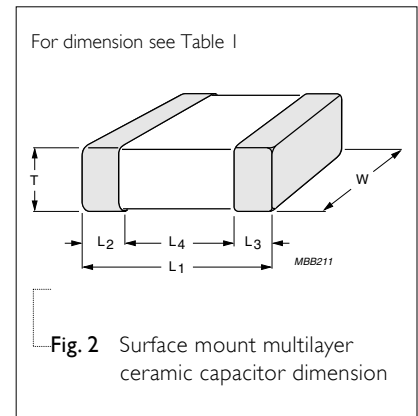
Surface mount multilayer ceramic capacitor dimension
